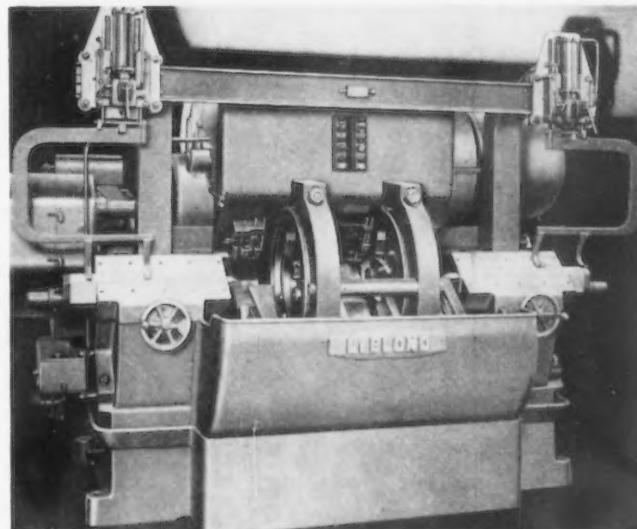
LeBlond model 7ACL is designed for rough turning all the line bearings of crankshafts.
